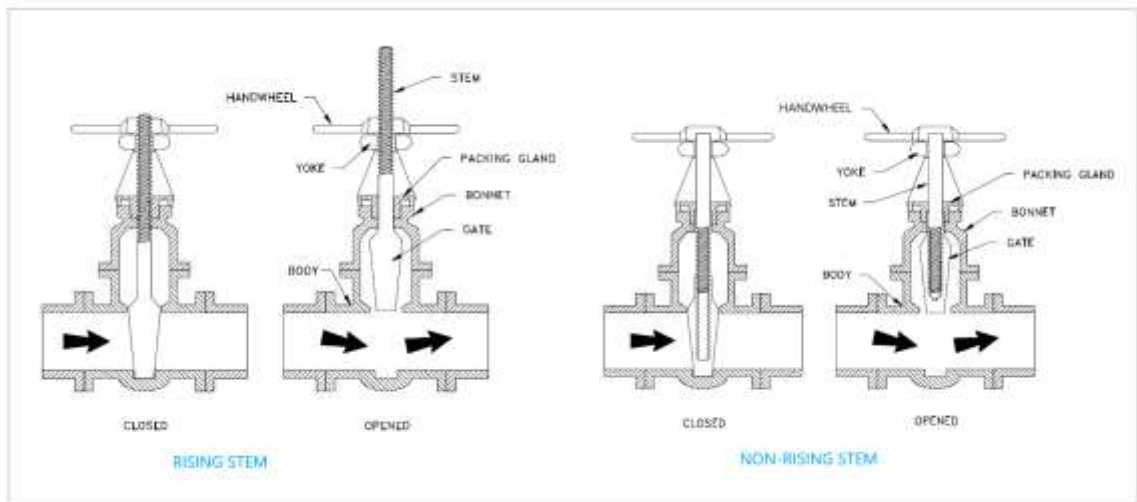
SHOWING DIFFERENCE BETWEEN RISING SPINDLE AND NON-RISING SPINDLE VALVES.
